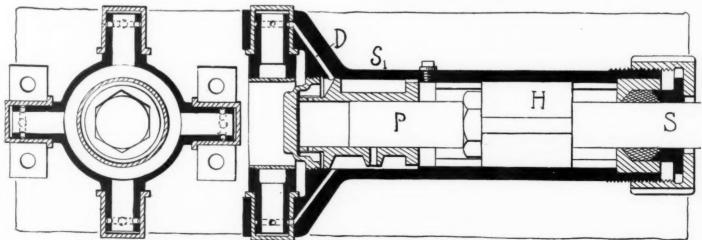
New design for the lubrication of the universal joint brought out by D. Napier & Son, Ltd.
